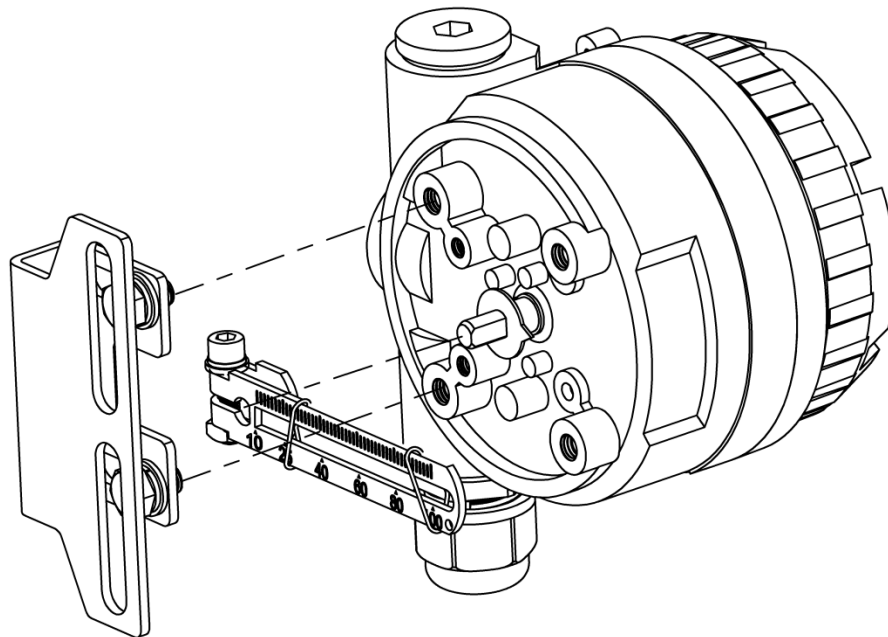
Feedback lever B and mounting bracket installation (remote type)
